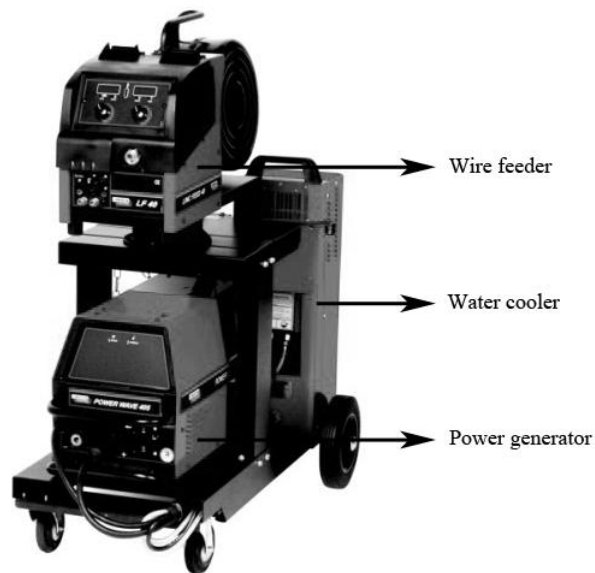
Lincoln welding machine, with power generator, wire feeder and water cooler
